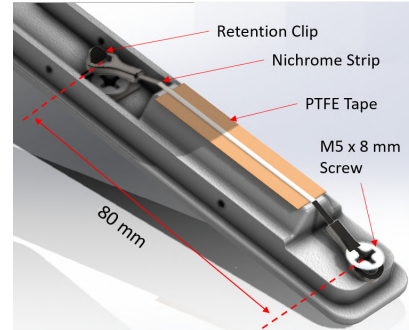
Assembly of the nichrome strip (80 mm) along with the retention clip, PTFE tape, and fasteners.
